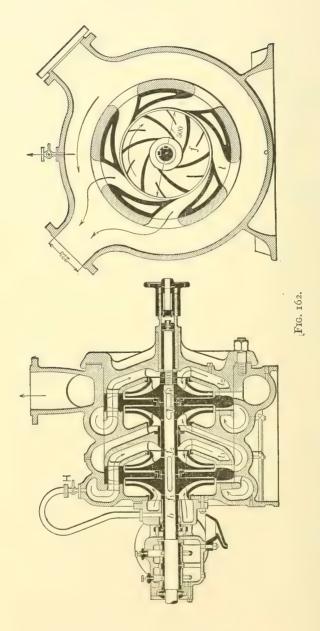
shows a side view of a turbine and pump, the pump being at the left-hand end. Fig. 162 is a section taken through the stage centrifugal pump.
